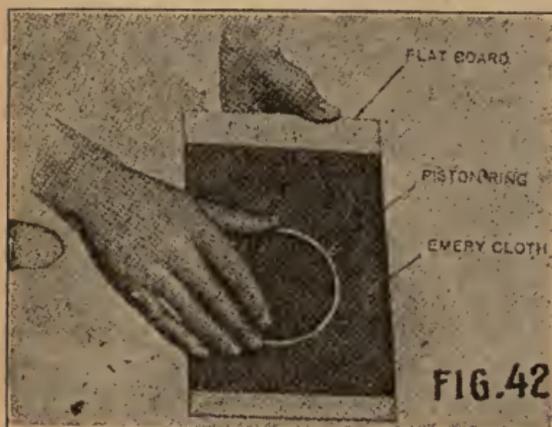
Trimming board and method of using it to secure proper ring fit in groove.
